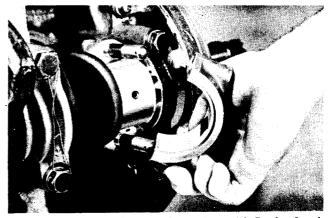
Checking Rod Bearing with Feeler Stock
